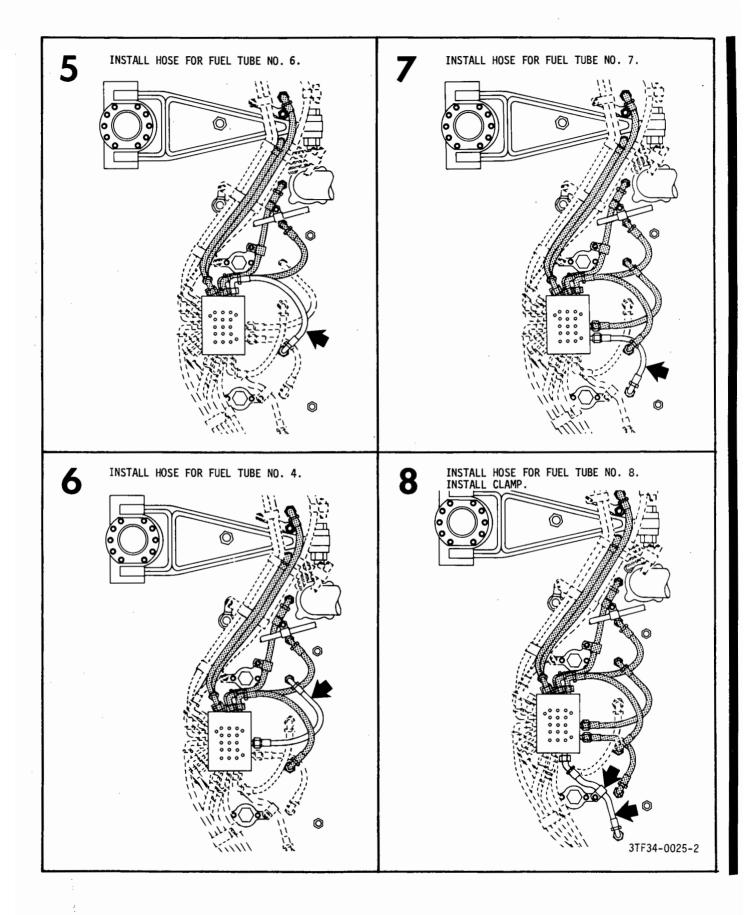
Fuel Manifold Installation (Sheet 3 of 6)
